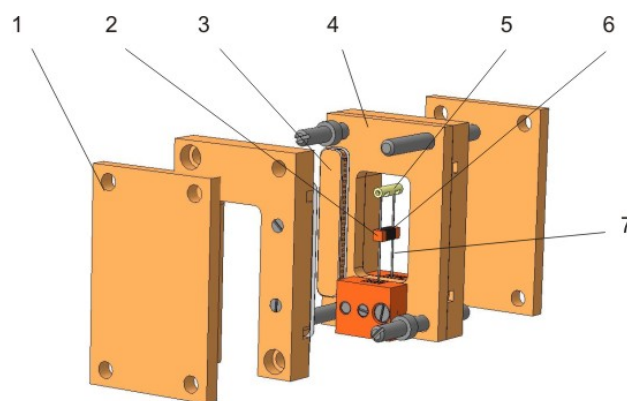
Sample arrangement in the holder. 1 – Thermostat cover, 2 – probe pads, 3 – heating element, 4 – thermostat base, 5 – ceramic screed, 6 – TEM sample, 7 – probe rack.
